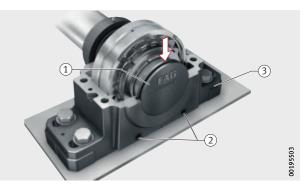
Inserting the shaft and the locating ring(s), locating bearing arrangement (example: SAF500)
